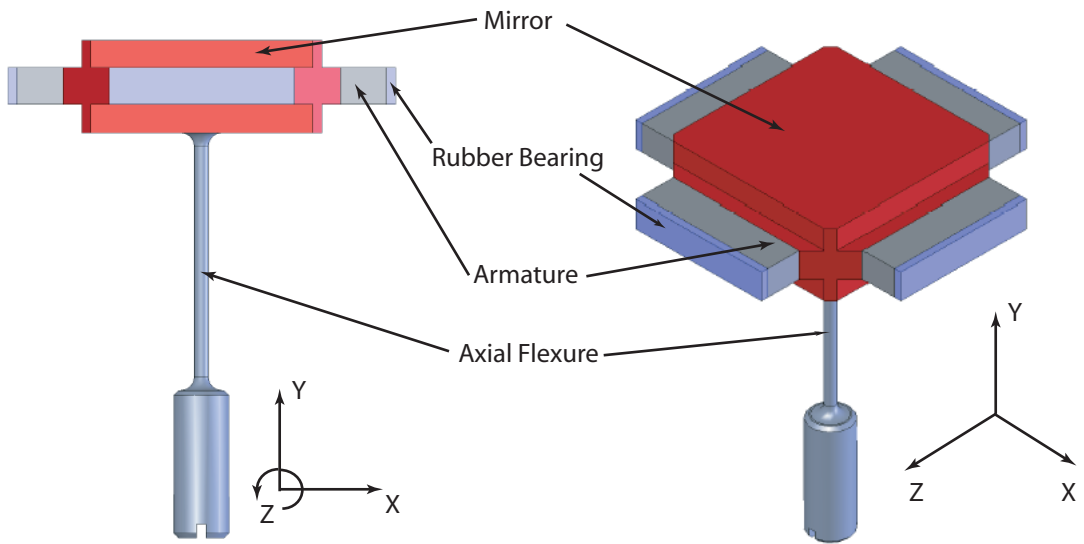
CAD model view of the AFSM moving mechanical components.
